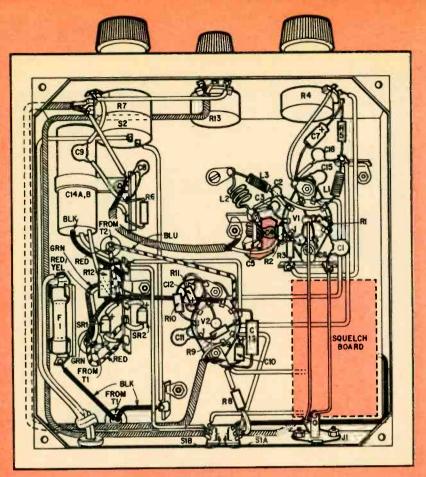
Most critical part of the circuit is around VI in upper right corner. Get parts and leads in positions shown or the receiver may not tune whole band.
